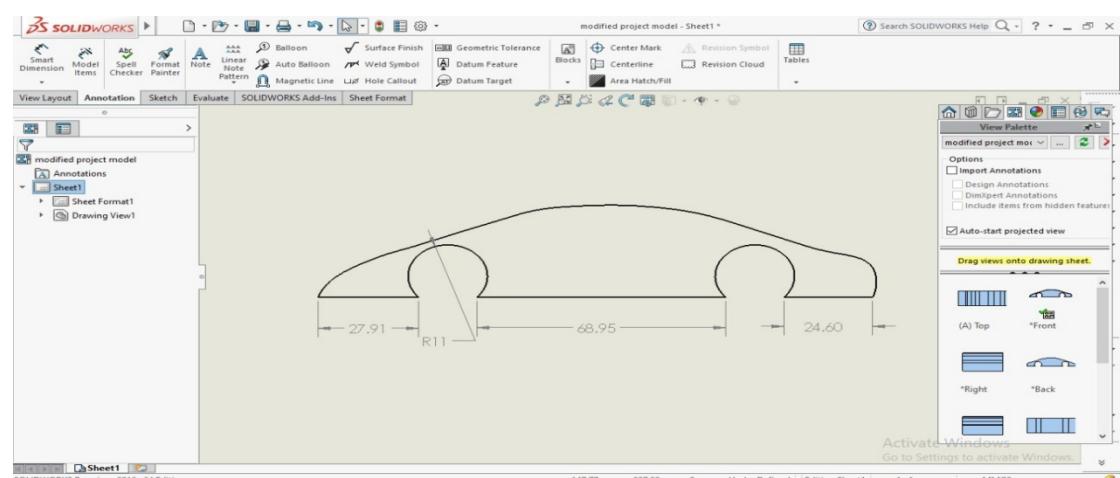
Drag Minimised Model Dimensions with Front View
